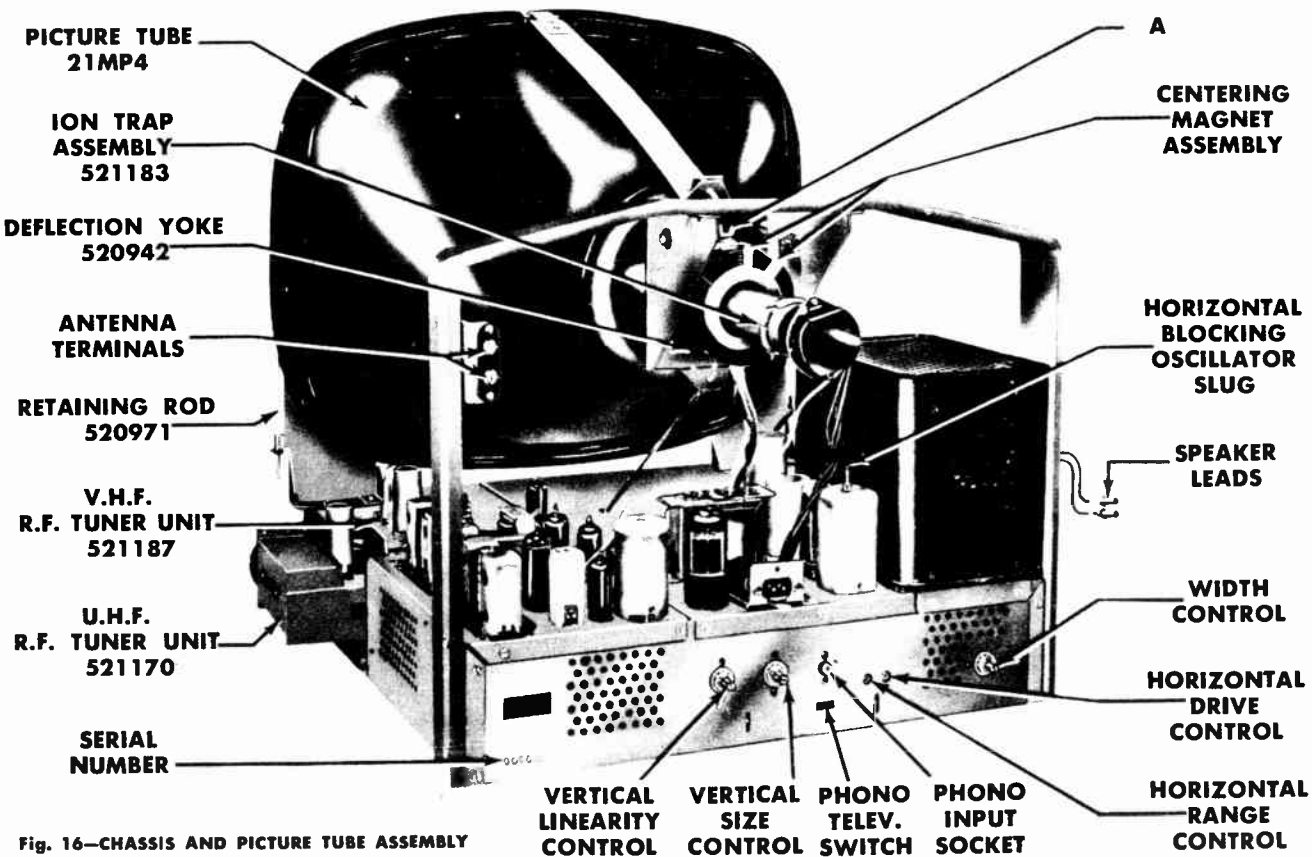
CHASSIS AND PICTURE TUBE ASSEMBLY
